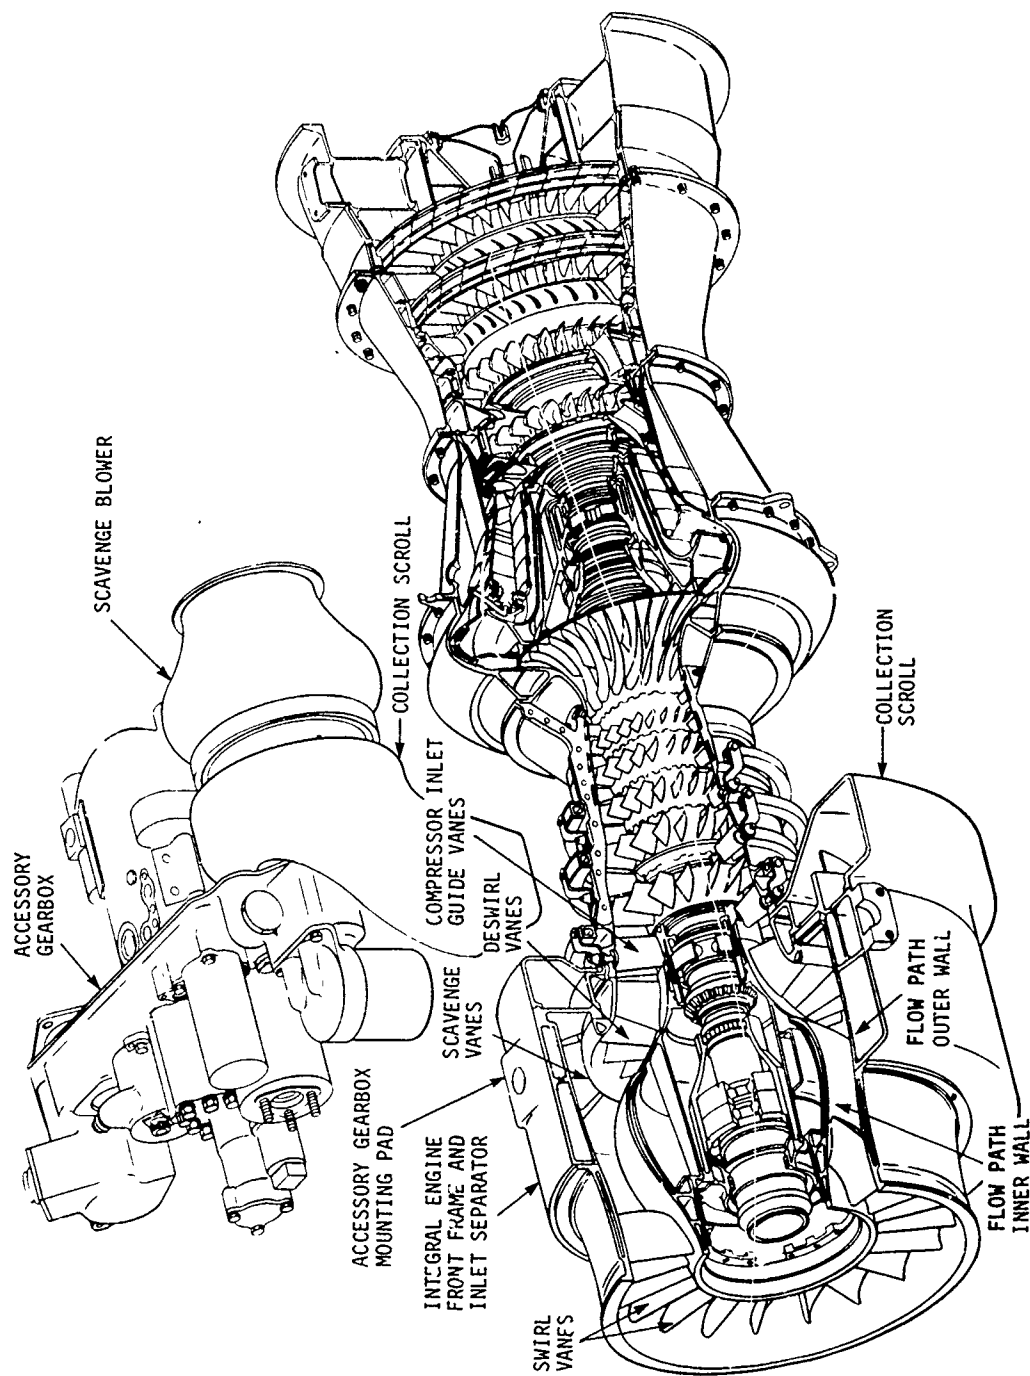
T700 Turboshaft Engine With Inlet Separator.
